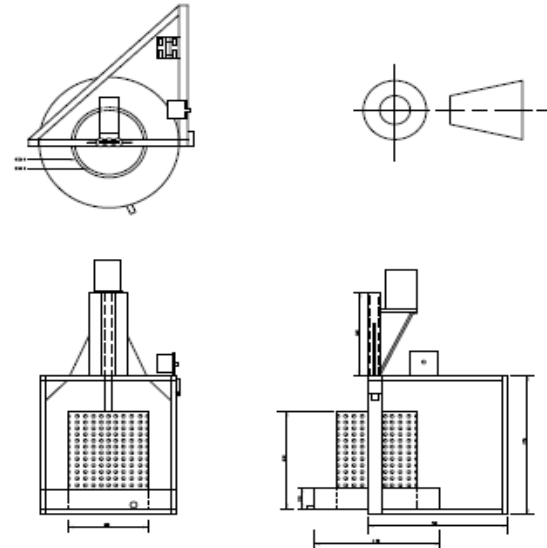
Orthographic Drawing of the Motorized Hydraulically Operated Palm Oil Press.
